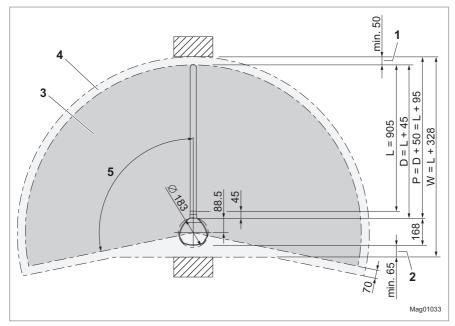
Swivel range mSwing variant with bracket ((dimensions in mm) L is a standard dimension
